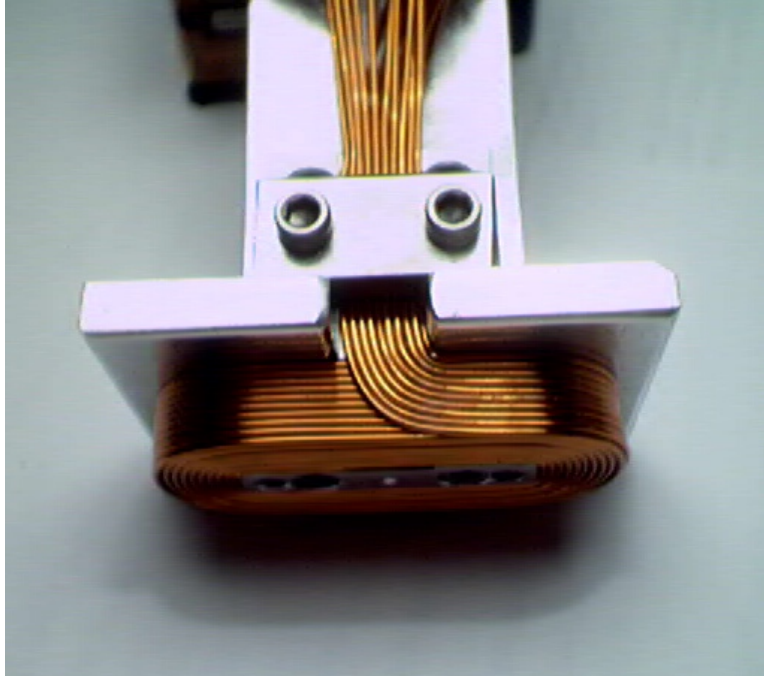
Stainless steel mandrel and forming tools used to wind the AFSM coils, shown with a coil installed. Photo courtesy of Fred Sommerhalter.
